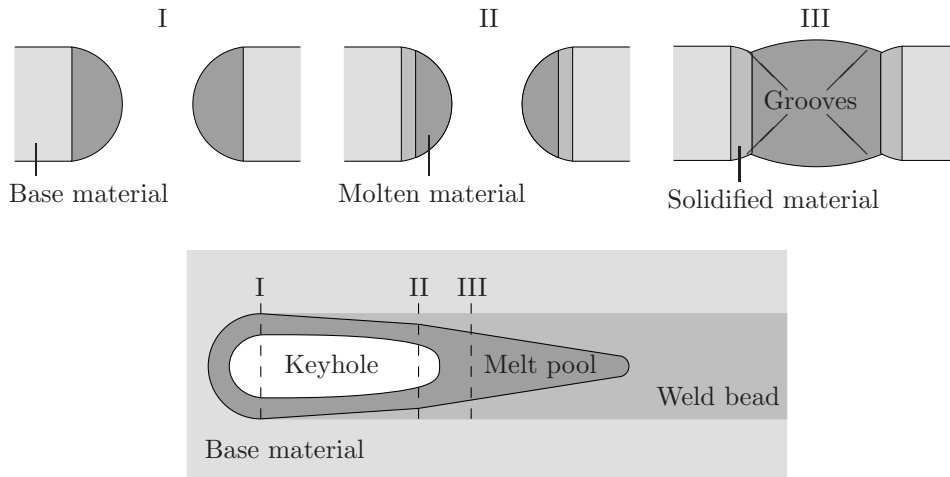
Schematic drawing of the welding process to illustrate the formation of the grooves along the side of the elongated keyhole weld bead.
